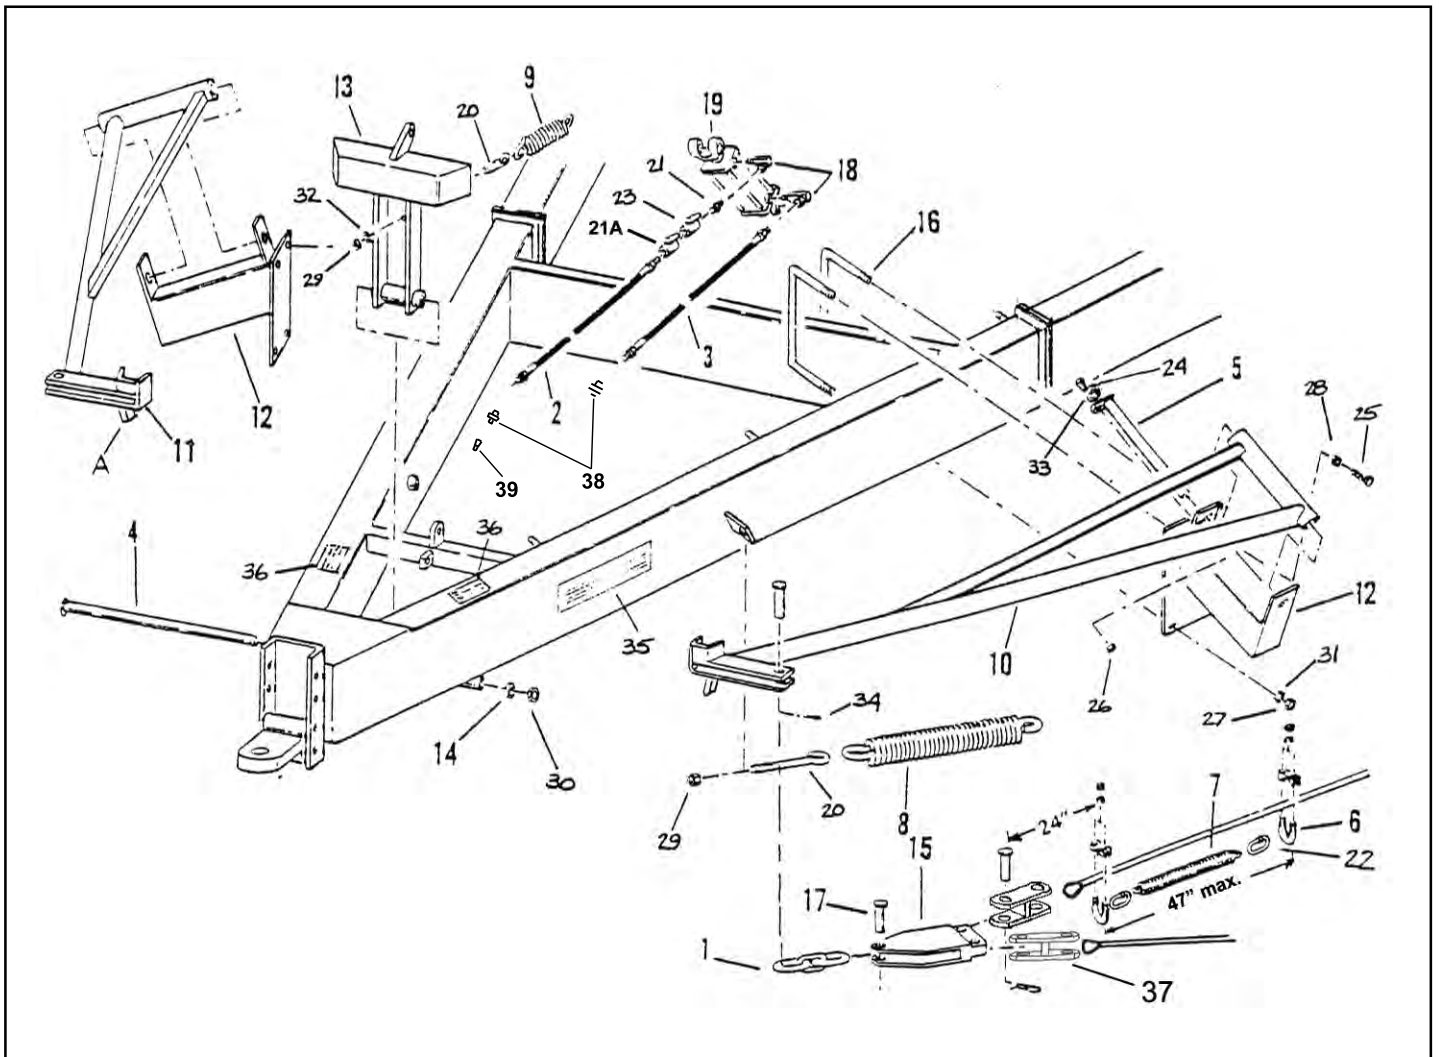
Assembly: Cable Auto-Fold (20 Ft. Hitch)
